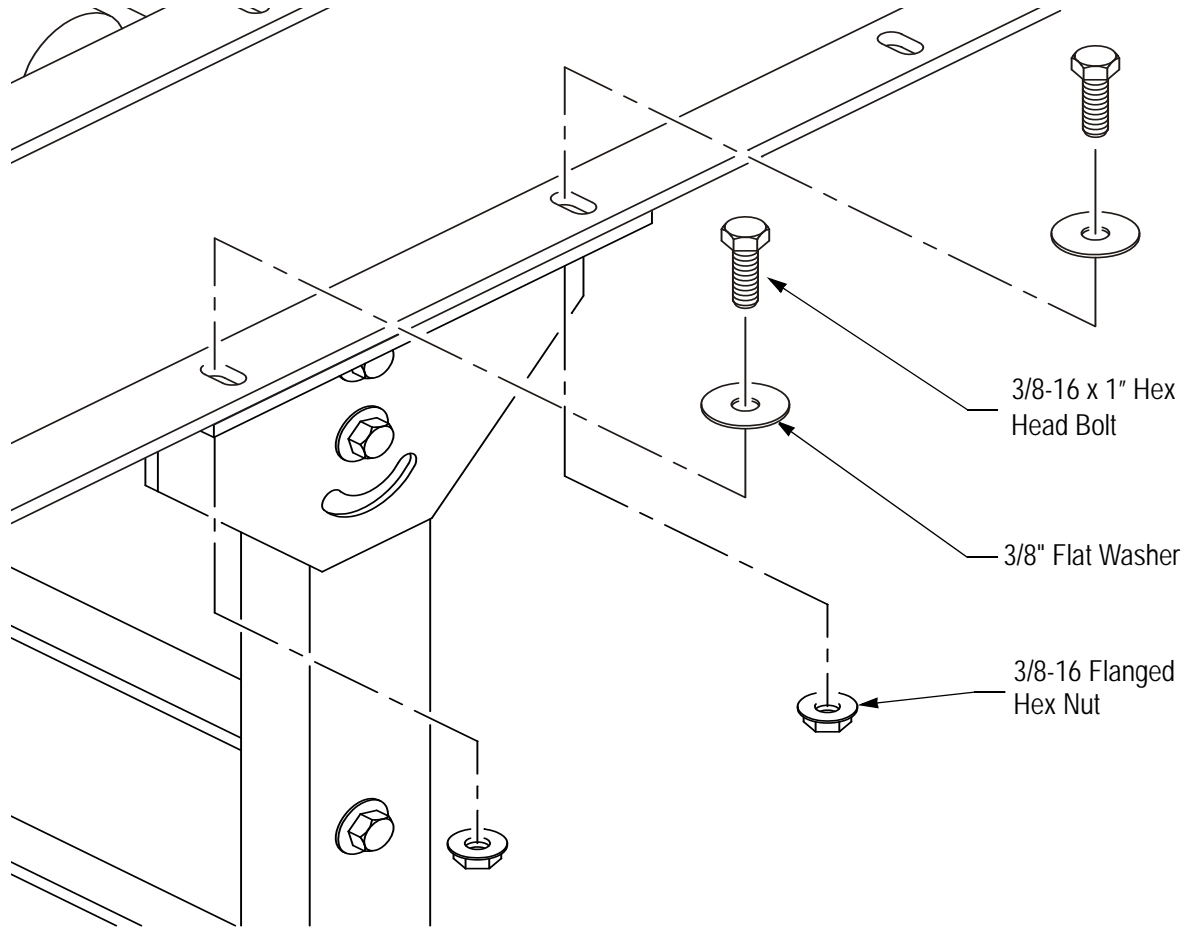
Mounting a Floor Support (FSL, FSM)
